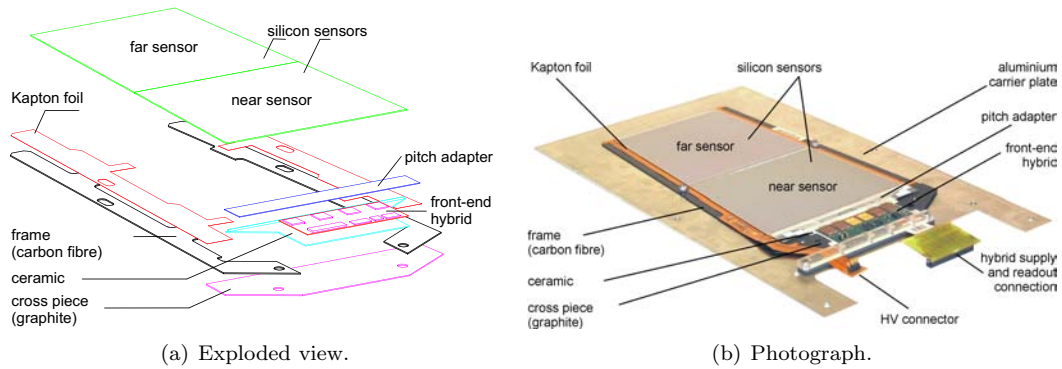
A CMS tracker silicon strip module with two daisy-chained sensors. The photograph shows a TEC ring 6 module, mounted on a carrier plate [3].
